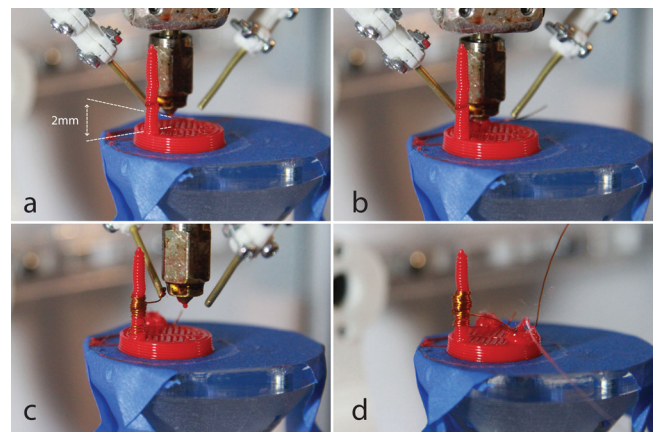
Printing a simple coil: a) Print head stopped 2mm above the printing surface; b) Extruding filament to create the anchor point; c) Coiling; d) Printed result.
